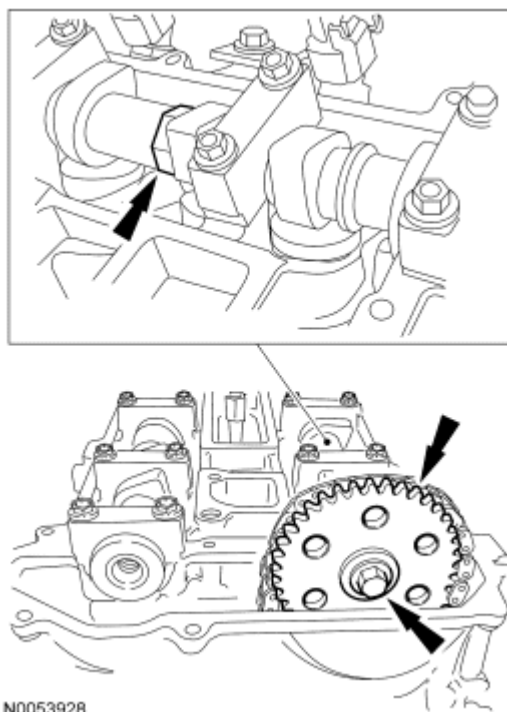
Locating Camshaft Bolt And Intake Camshaft Drive Gear
